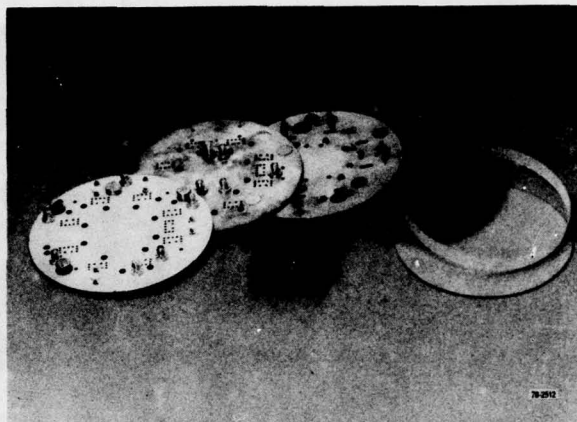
Exploded View of Test Antenna Showing Back View of Components, Test Antenna and Antenna/Receiver
